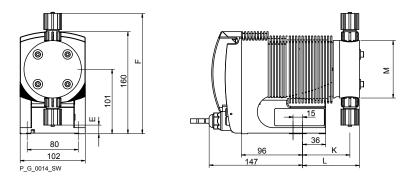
Dimensional drawing gamma/ L, material versions NPE, NPB (without bleed valve) - dimensions in mm
